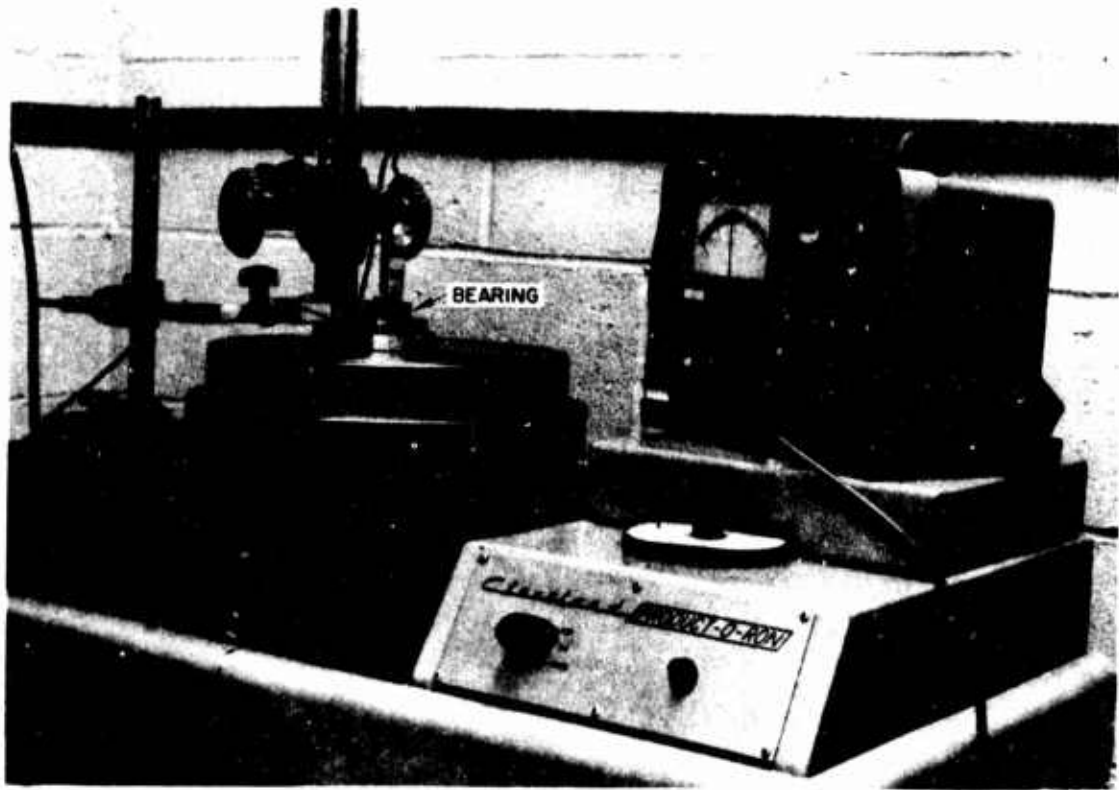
Indi-Ron during inspection of bearing.
